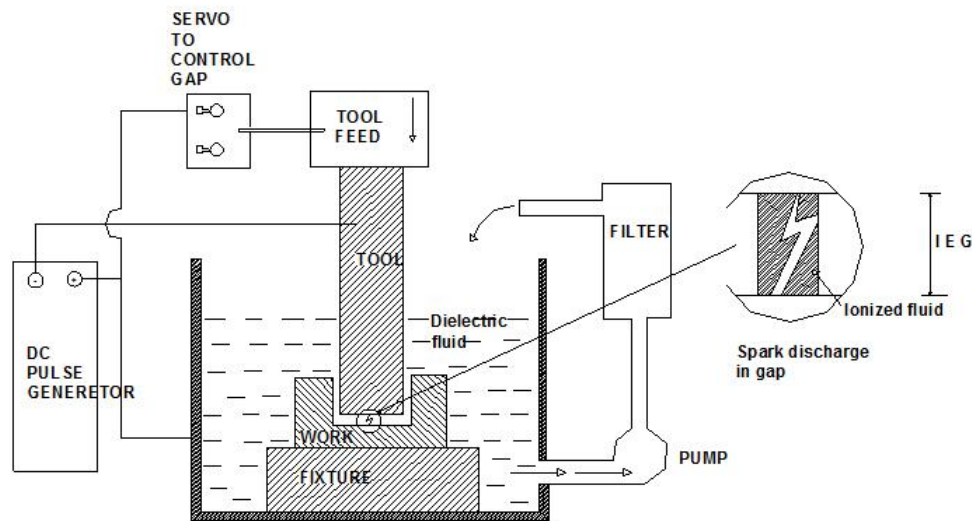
Schematic of electrical discharge machining (EDM) process
